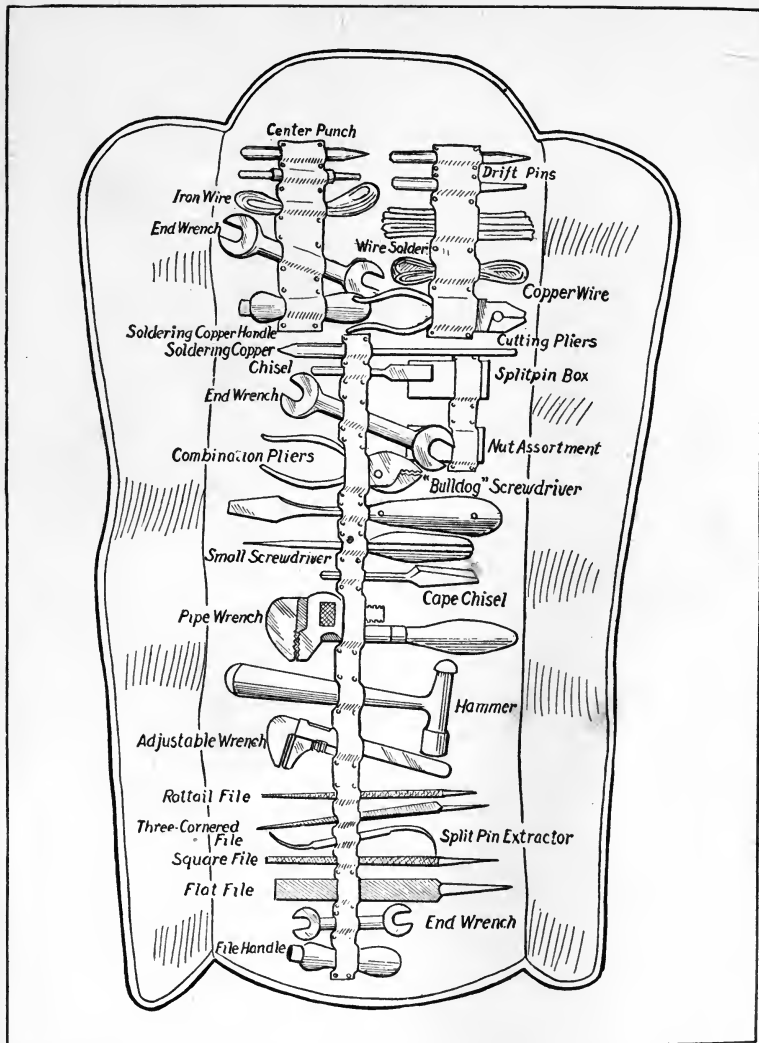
Tool Roll Suitable for Making All Ordinary Repairs on Automobile Mechanism.
